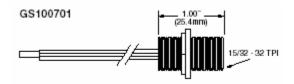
GS100701 Gear Tooth Sensor (Courtesy Cherry Sensor)
